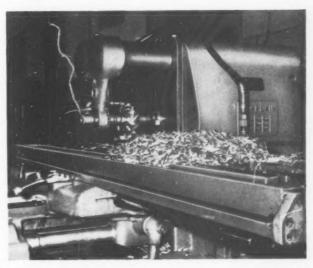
Milling a Semi-circular Groove in an Alloy Steel Workpiece, Containing 0·2 per cent. of Carbon and 13 per cent. of Chromium, with Special Interlocking Form Cutters of 40-deg. Rake Angle, 10-deg. Clearance Angle and 40-deg. Helix Angle. The Cutting Speed is 197 ft. per min., and the Traverse Rate 10½ in. per min.
